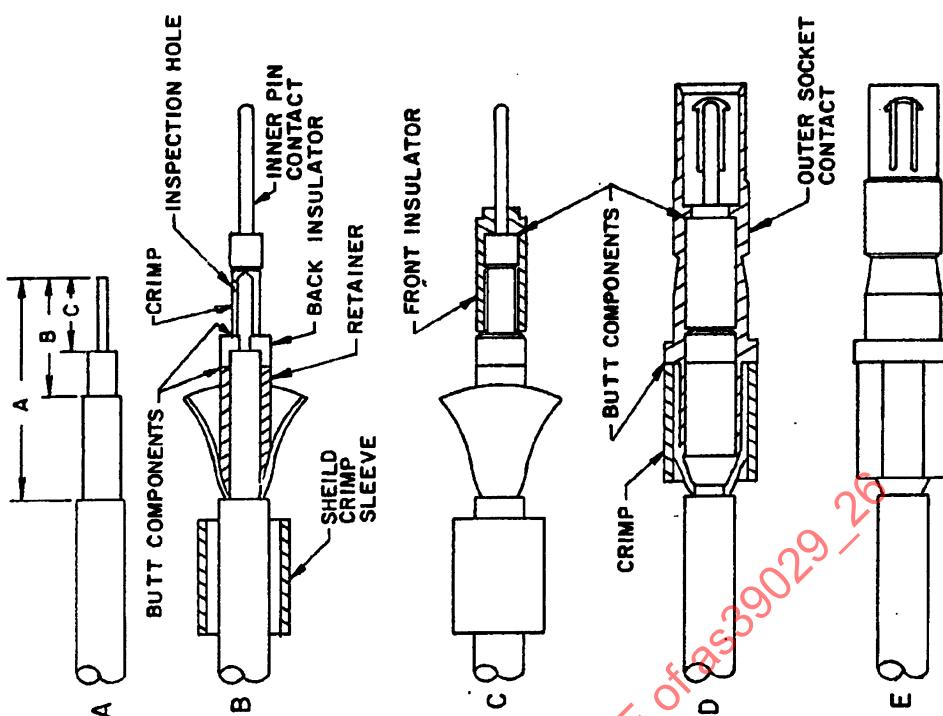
CABLE STRIPPING DIMENSIONS.
